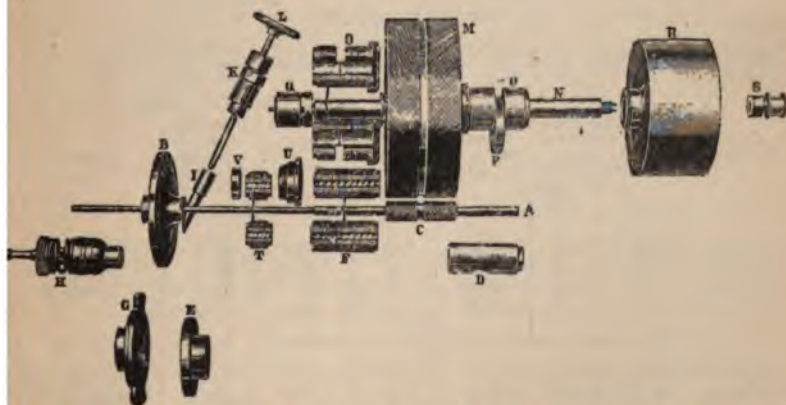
Parts of the De Laval Turbine. B is the Turbine Wheel; I the Nozzle; A the Shaft; M Gear Wheel, etc.
